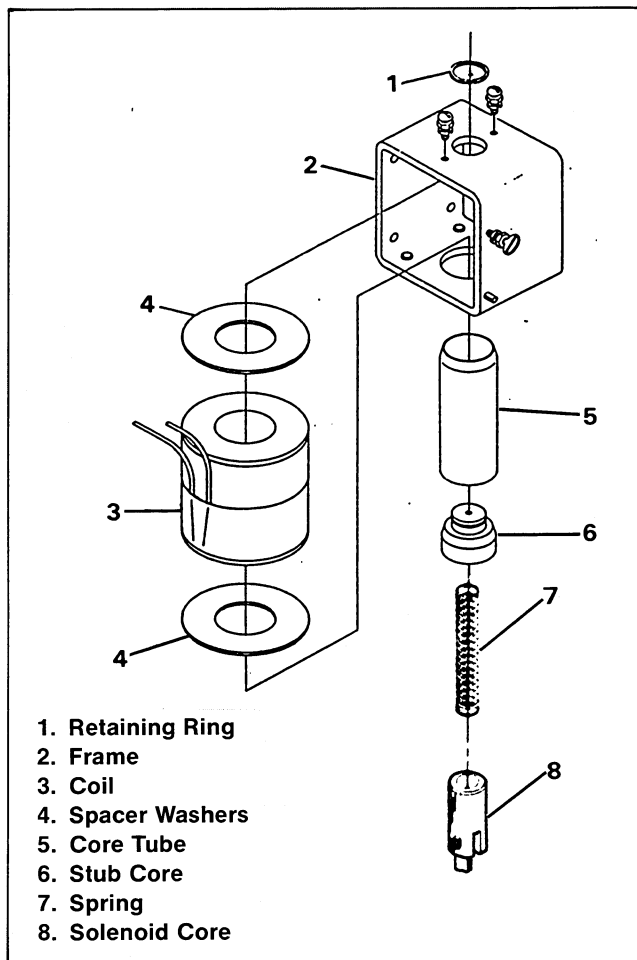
Solenoid Assembly (600 and 800 Ampere)
